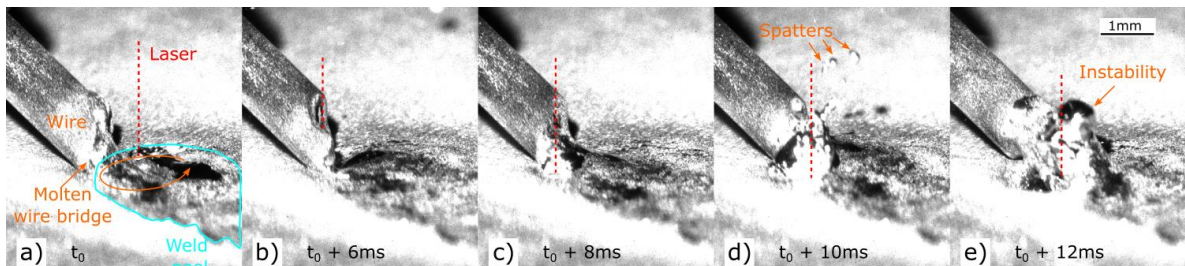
High-speed images of AW6005A-T6 welding with 0 mm gap. a) before laser melts wire, a bridge of molten material already binds it to the pool; the pool is as large as wobbling trajectory; b-c) wire gets molten by laser; d) when laser gets back in the pool an instability arises, causing spatters initially and e) a significant quantity of material to be blown up.
